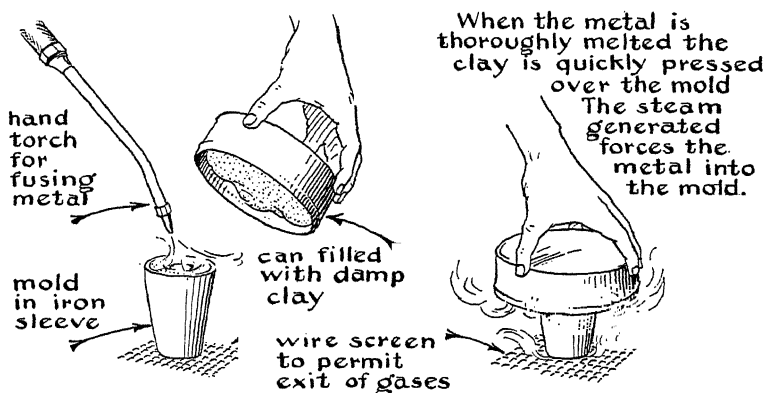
Lost-wax casting. Steam method for filling the mold.
